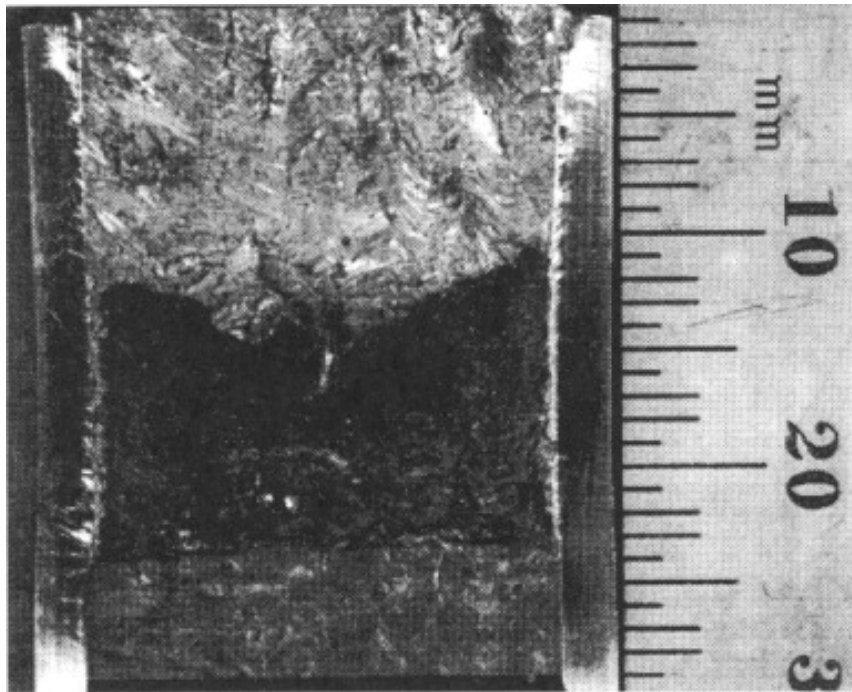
Fracture surface of aged weld metal PWER tested at 290°C
